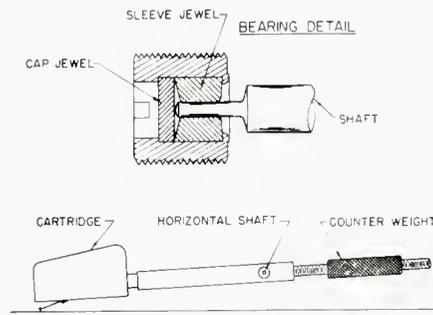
Detail showing bearing detail and arrangement of cartridge mounting.
